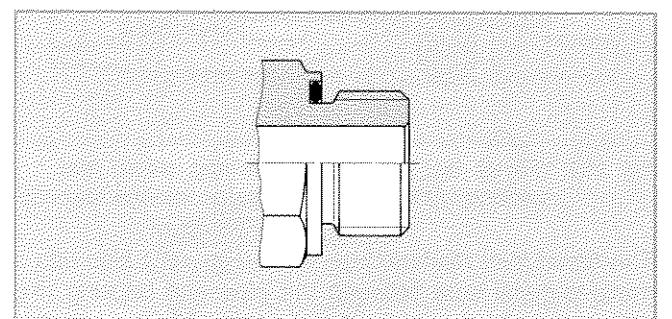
Profile seal, female port to DIN 3852, elastic seal, undercut as for sealing lip, tensile force on thread less than with O-ring
